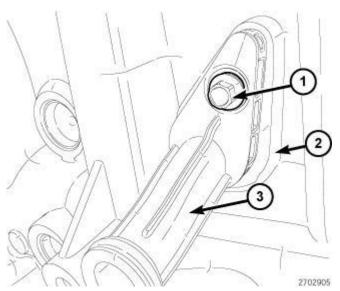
Coolant Tube O-Ring Seals Courtesy of CHRYSLER LLC
